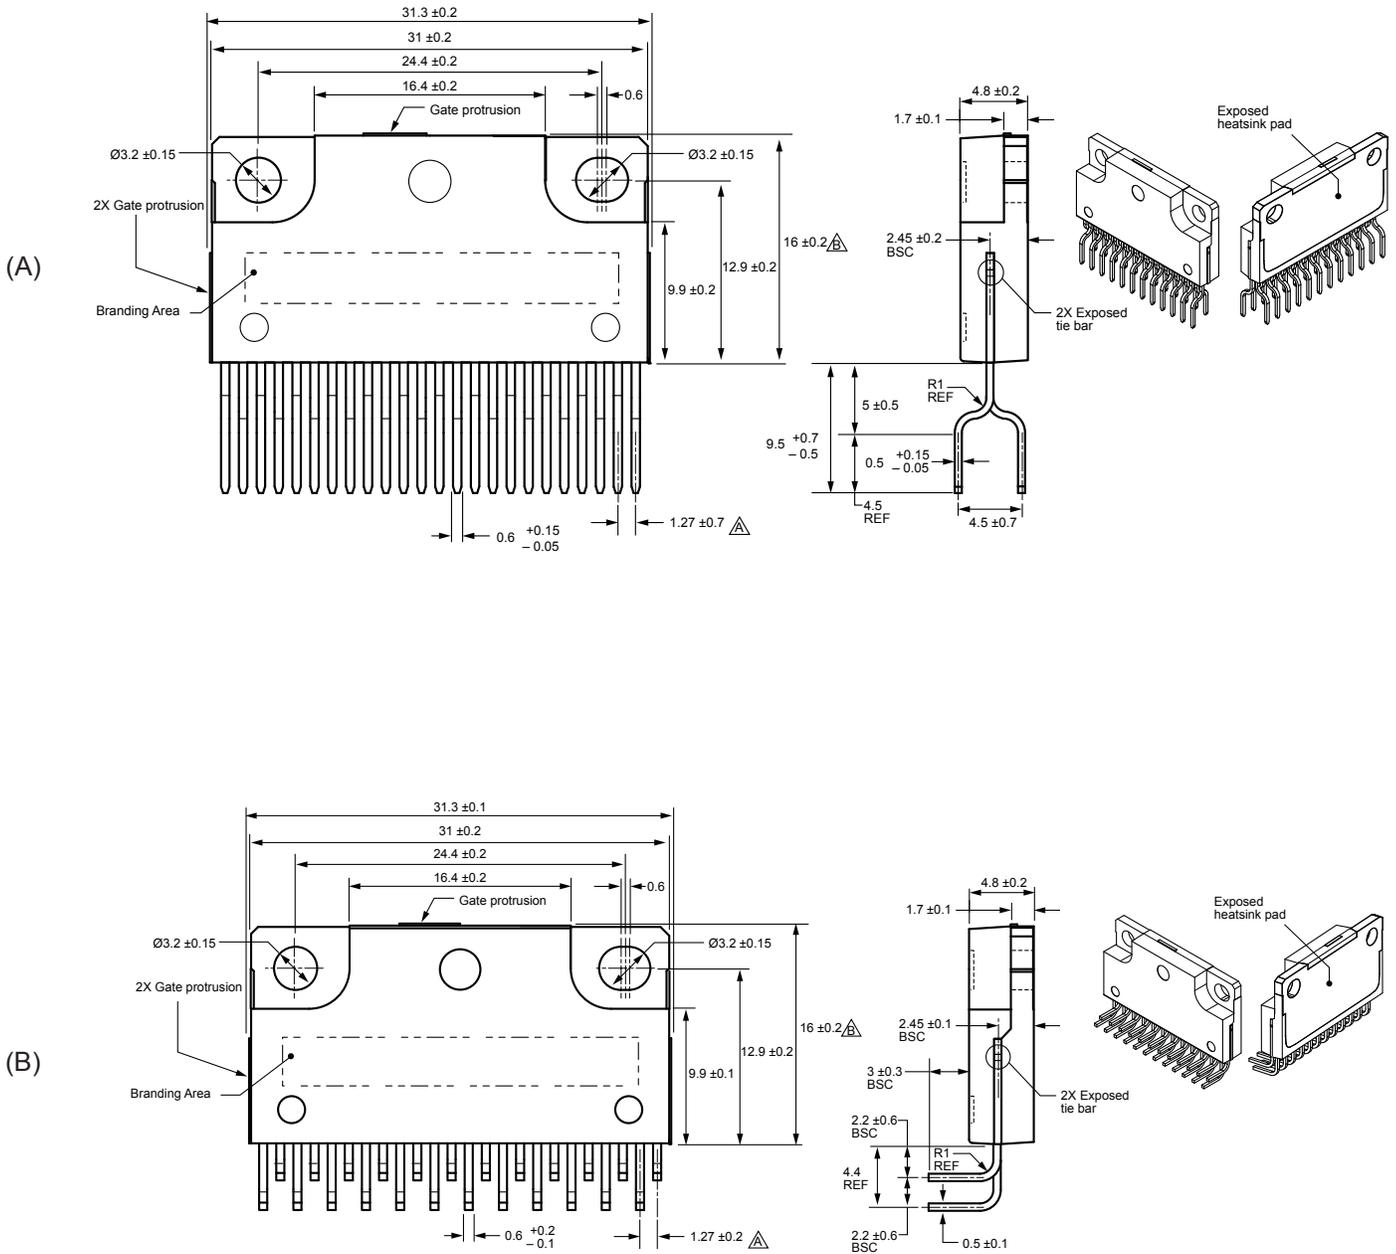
(A) and (B). Package Outline Drawings. (A) LF2171 vertical mount, (B) LF2175 horizontal mount, with heatsink pads.
